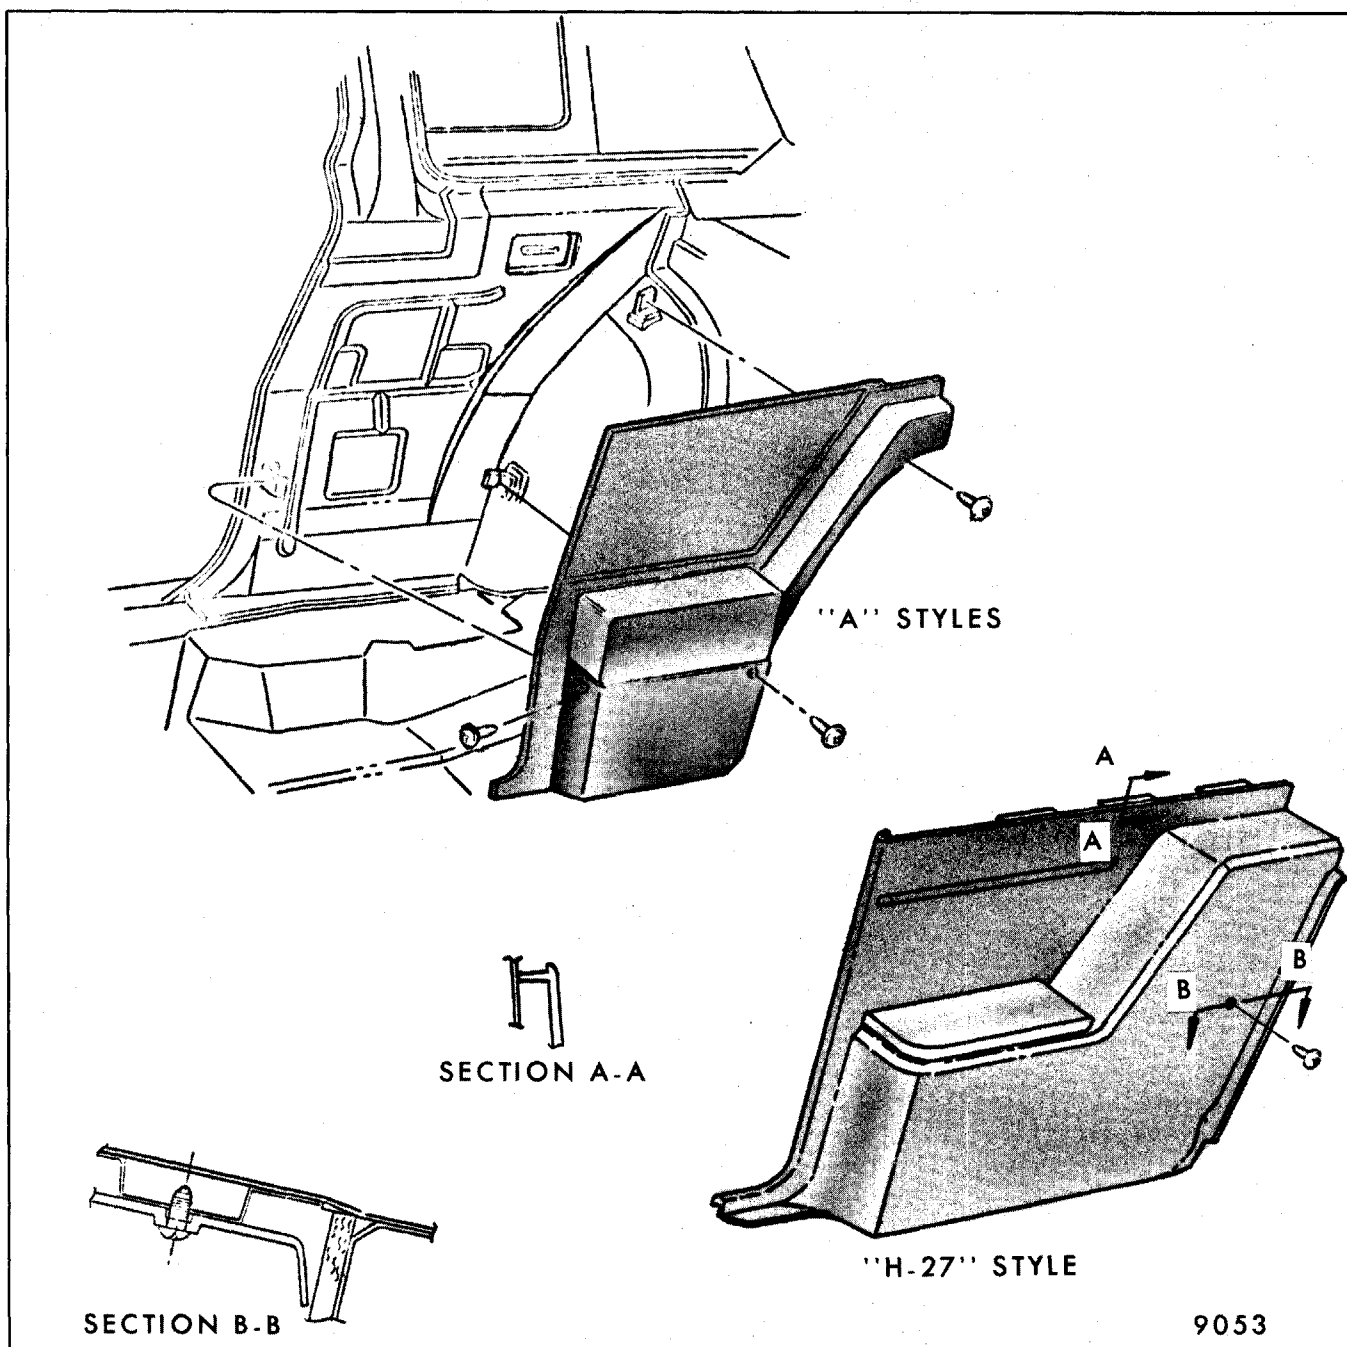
Quarter Trim Assembly Attachment - "A and H-27" Styles
